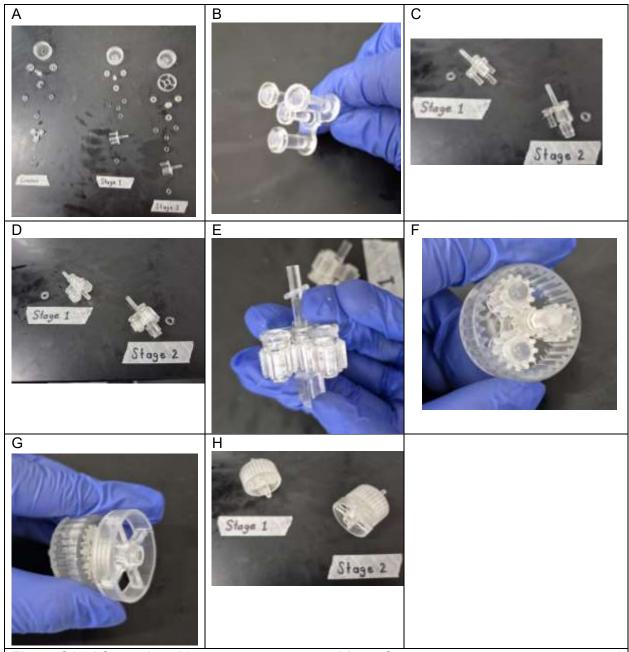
| Stage 1 and 2 gear systems assembly. a. Gear system components, separated by the subsystem they belong to. b. Placing the sun (middle) and planet gear spacers on the carrier. c. Placing the sun gears on the carriers. Stage 1 requires the sun gear shaft and Stage two the sun gear socket. Carrier spacer pictures off to the side of each carrier. d. Placement of the planet gears around the sun gear on the carrier. e. Placement of the carrier spacer on the bottom side of the carrier. f. Placement of the carrier assembly within the ring gear, completing Stage 1. g. Placement of the middle indicator on top of Stage 2's sun gear. h. Comparison between Stage 1 and Stage 2 gear systems.
